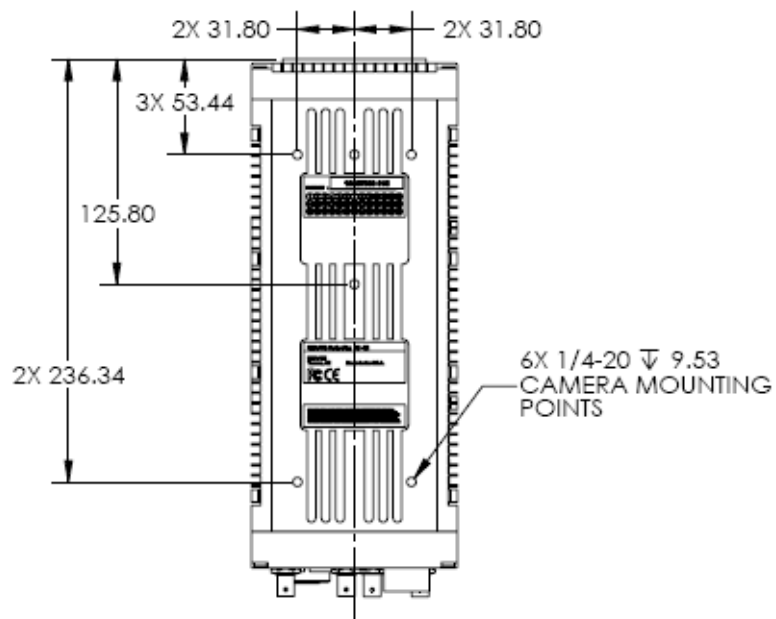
HG-XR/XL dimensions and mounting holes, bottom (in mm)
